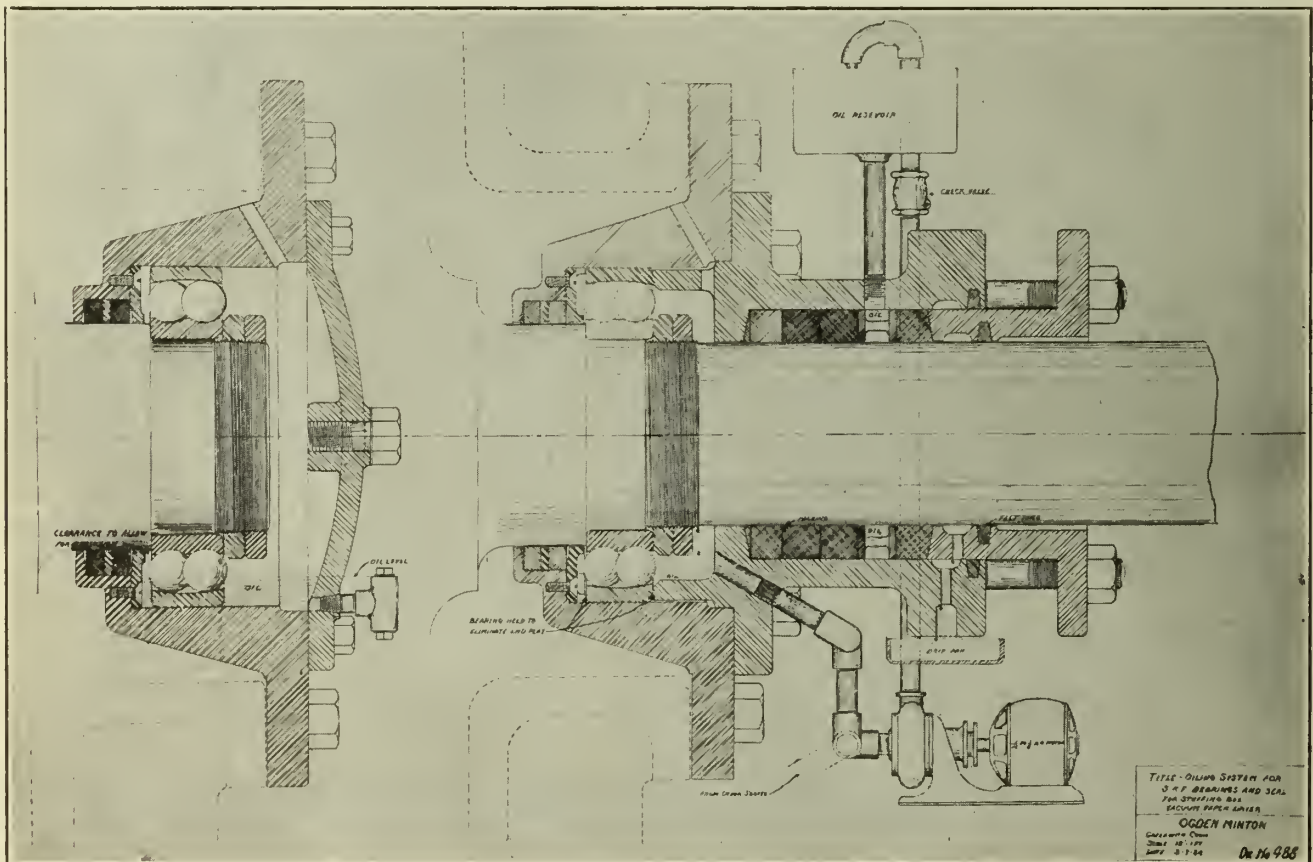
Method Used in Mounting Ball Bearings on Front and Rear Dryers. The rear dryer bearing is held and the front bearing is allowed to slide to take care of expansion of the dryer when the temperature is raised.
